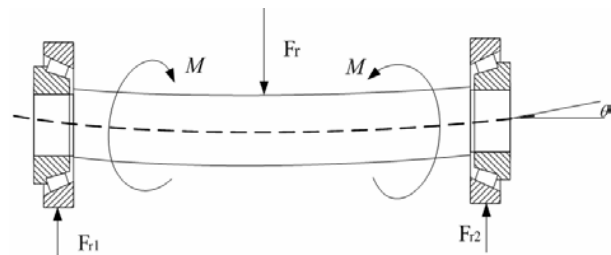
Bending deformation of the tapered roller bearing-rotor system.
